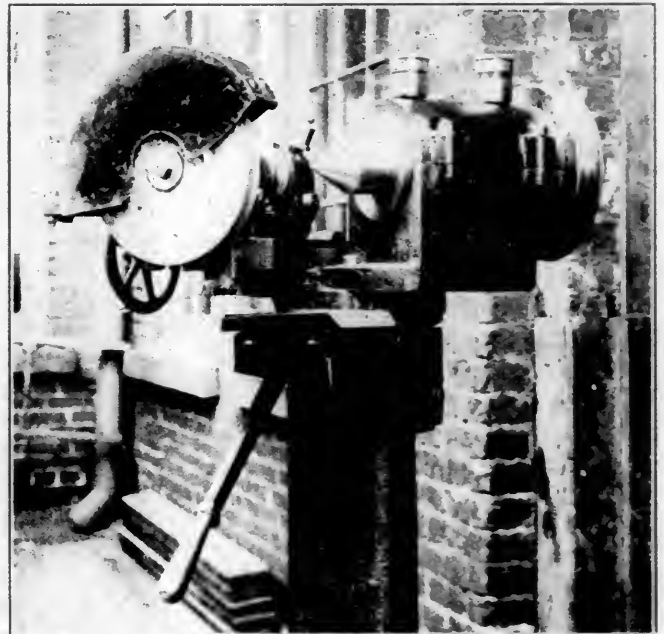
LATHE CENTER GRINDING MACHINE.
